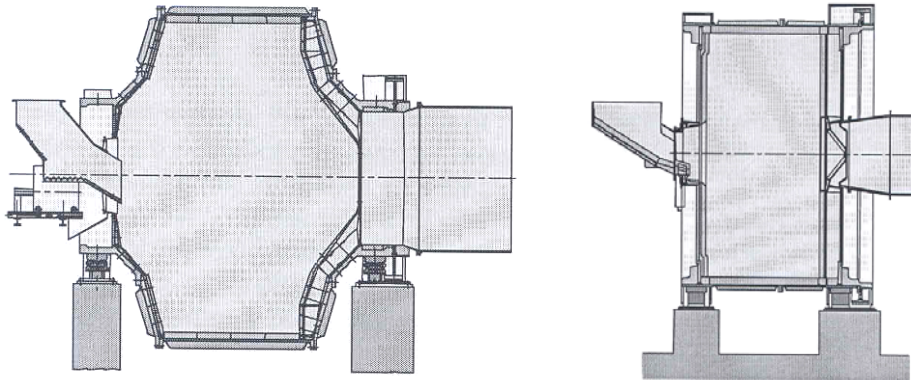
Conventional (left) and shell supported (right) SAG mill design [Krupp Polysius AG].
